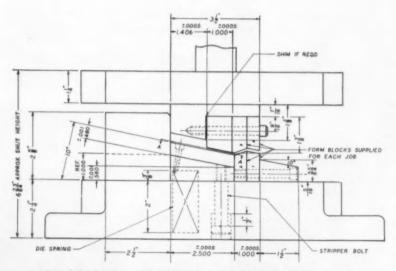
B. Cross-section "B-B", front elevation, with tooling set up for forming offset bends.
